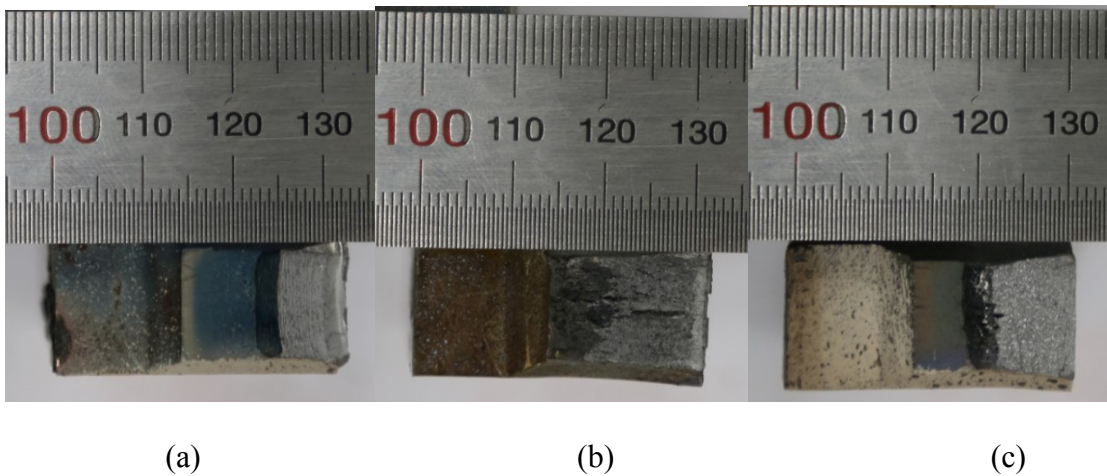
Fracture surfaces of specimens: (a) Weldox700, (b) G350, (c) G250 (major unit 10 mm)
